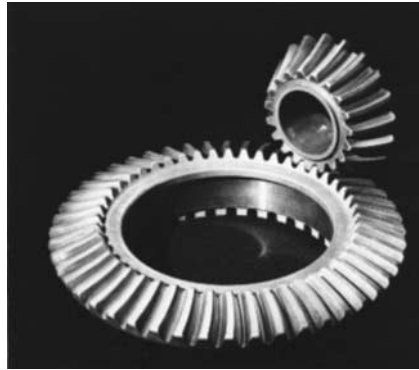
Zerol bevel set. (Gleason Machine Division.)
